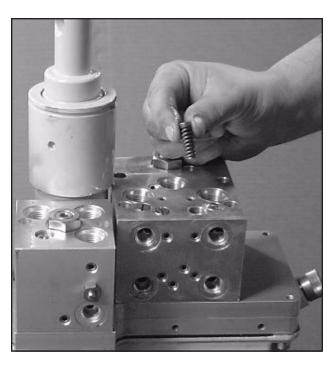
Assemble the Relief Valve Spring to the Ball Seat then drop into the cavity with the Ball Seat up.
